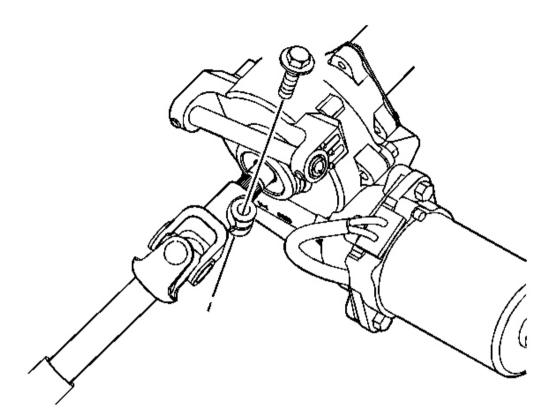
Intermediate Shaft Pinch Bolt & Steering Column Courtesy of GENERAL MOTORS CORP.
